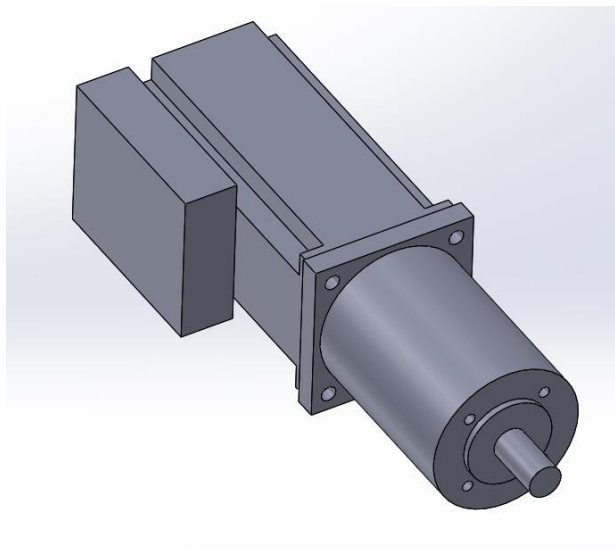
Nema23 stepper motor shape mounted to compatible gearbox
